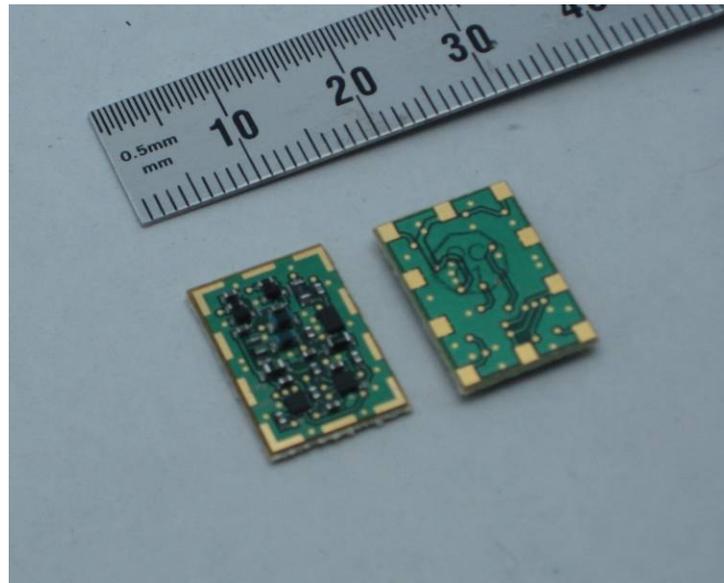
FASTROAD prototype module; top (left) and bottom (right) sides of module are shown
